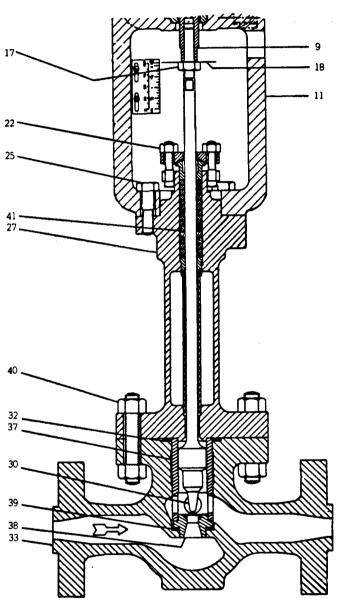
DOS, Cage Trim, Socket Weld End Type. May also be butt weld end, Flanged End or 90° Angle Type.
